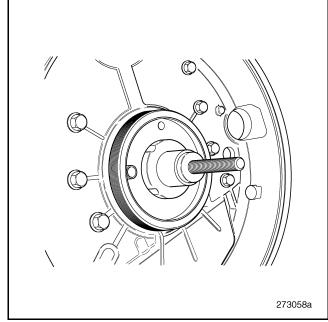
Crankshaft Rear Seal Positioned on Tool
